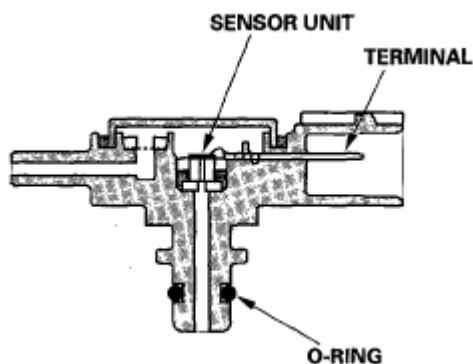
Identifying Fuel Tank Pressure (FTP) Sensor, Terminal And Units
